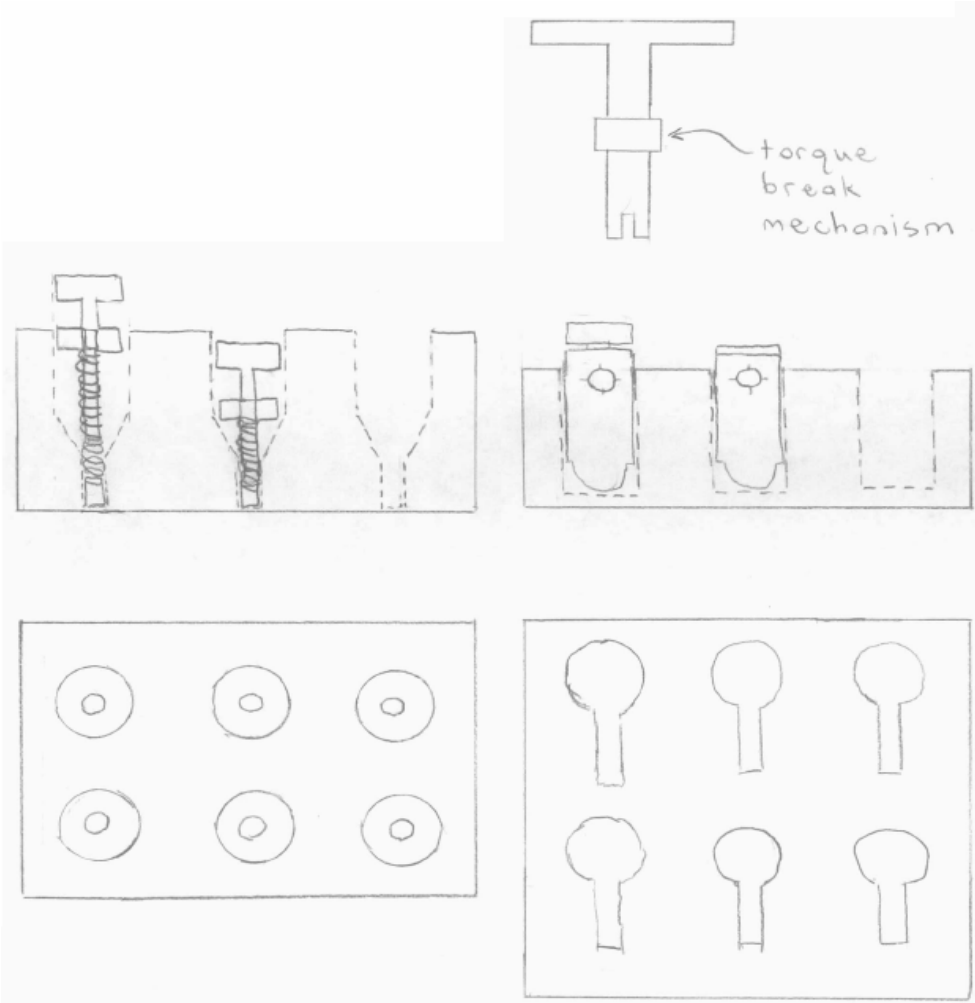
Design 4, Concept of a Two-Step Multi-Assembly Jig
